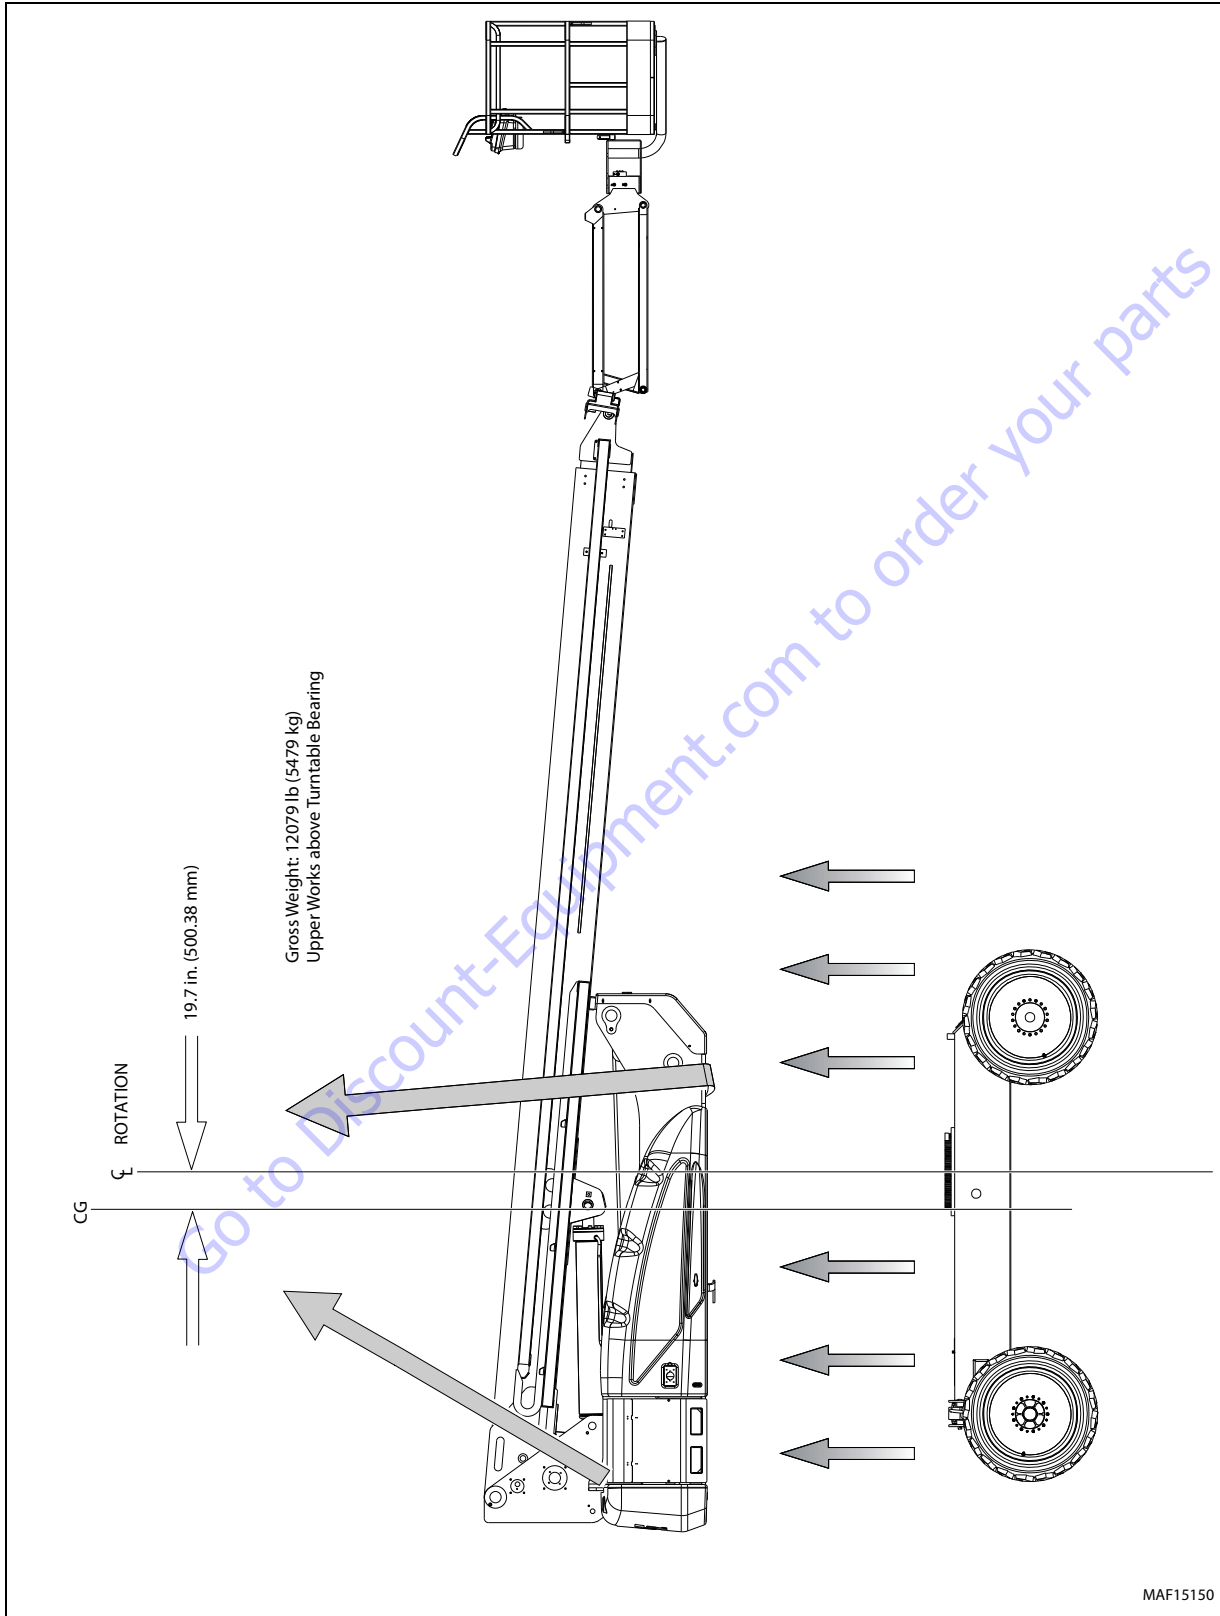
Swing Bearing Removal - EC600SJ & H600SJ
